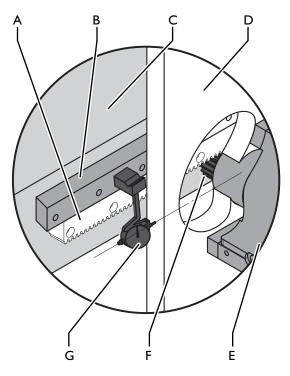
Checking the tooth flank backlash: Dial gauge (exact method)
